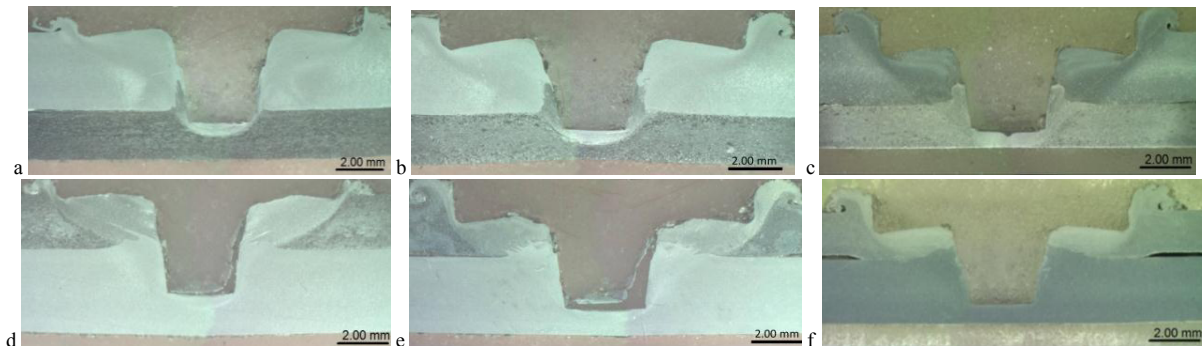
Macrographic appearance of the welded joints: (a) 5-6-2; (b) 5-6-6; (c) 5-6-10; (d) 6-5-2; (e) 6-5-7; (f) 6-5-10.
